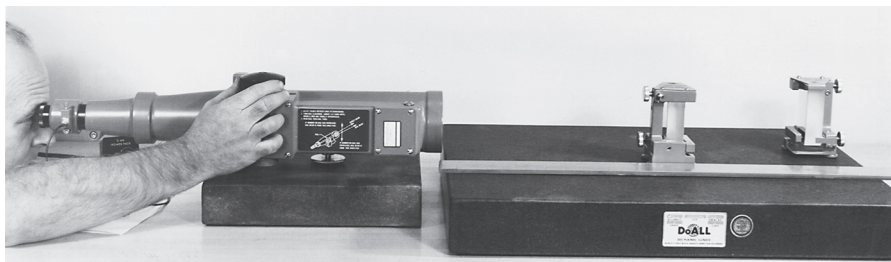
Autocollimator checking a surface plate for flatness (Courtesy of DoALL Company).
